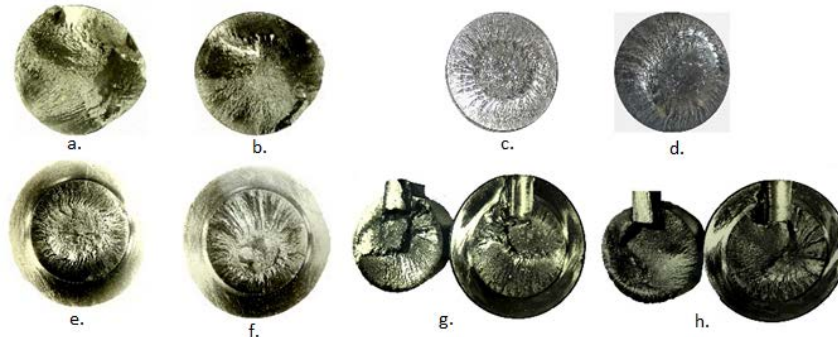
Heat shrinkage shafts and shaft joints (a, e, c, g) and low (b, f, d, h): a, b – glossy; e, f – with a rounding; c, d – with V-shaped knuckles; g and h – shontoons
